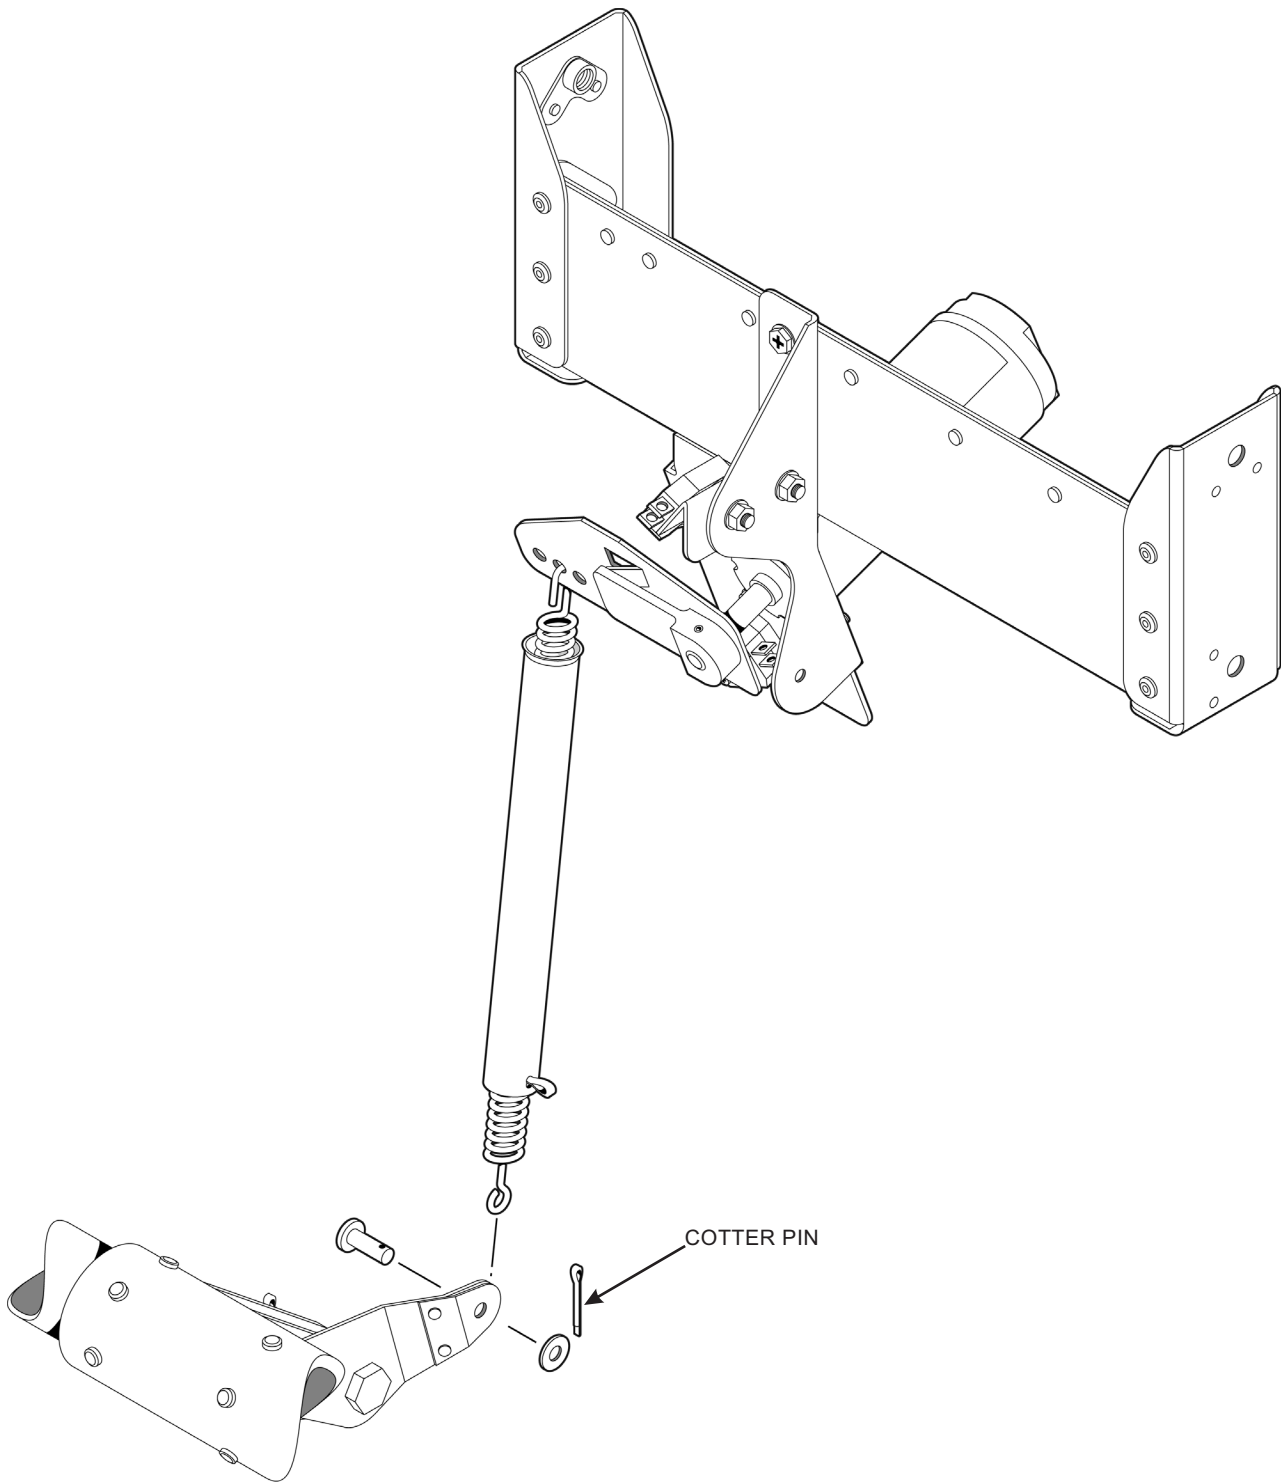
Longitudinal Trim Assembly Spring Attachment
